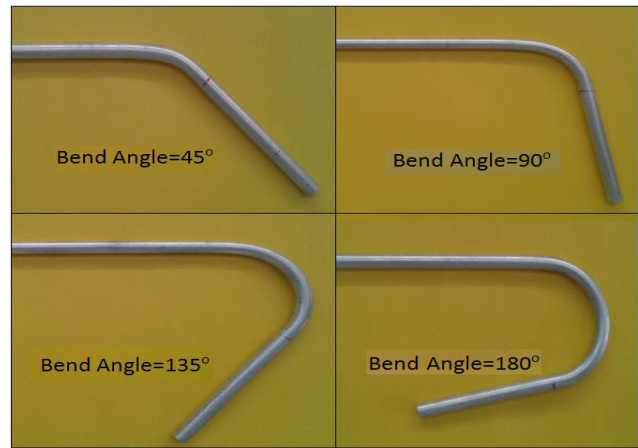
Tube Bends For Different Angle For Bending Radius 40mm
